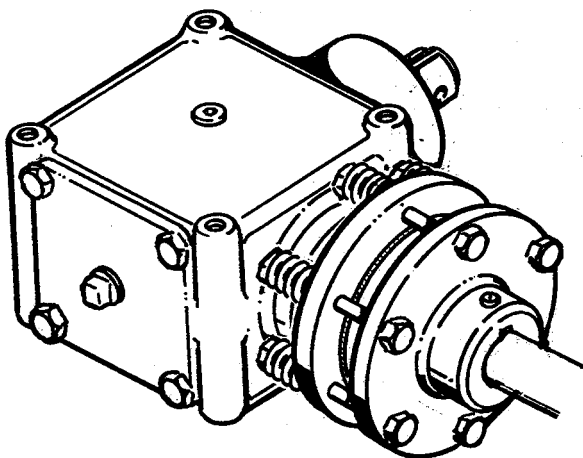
Tiller bevel gear box and protective slip clutch as seen from behind tiller.
